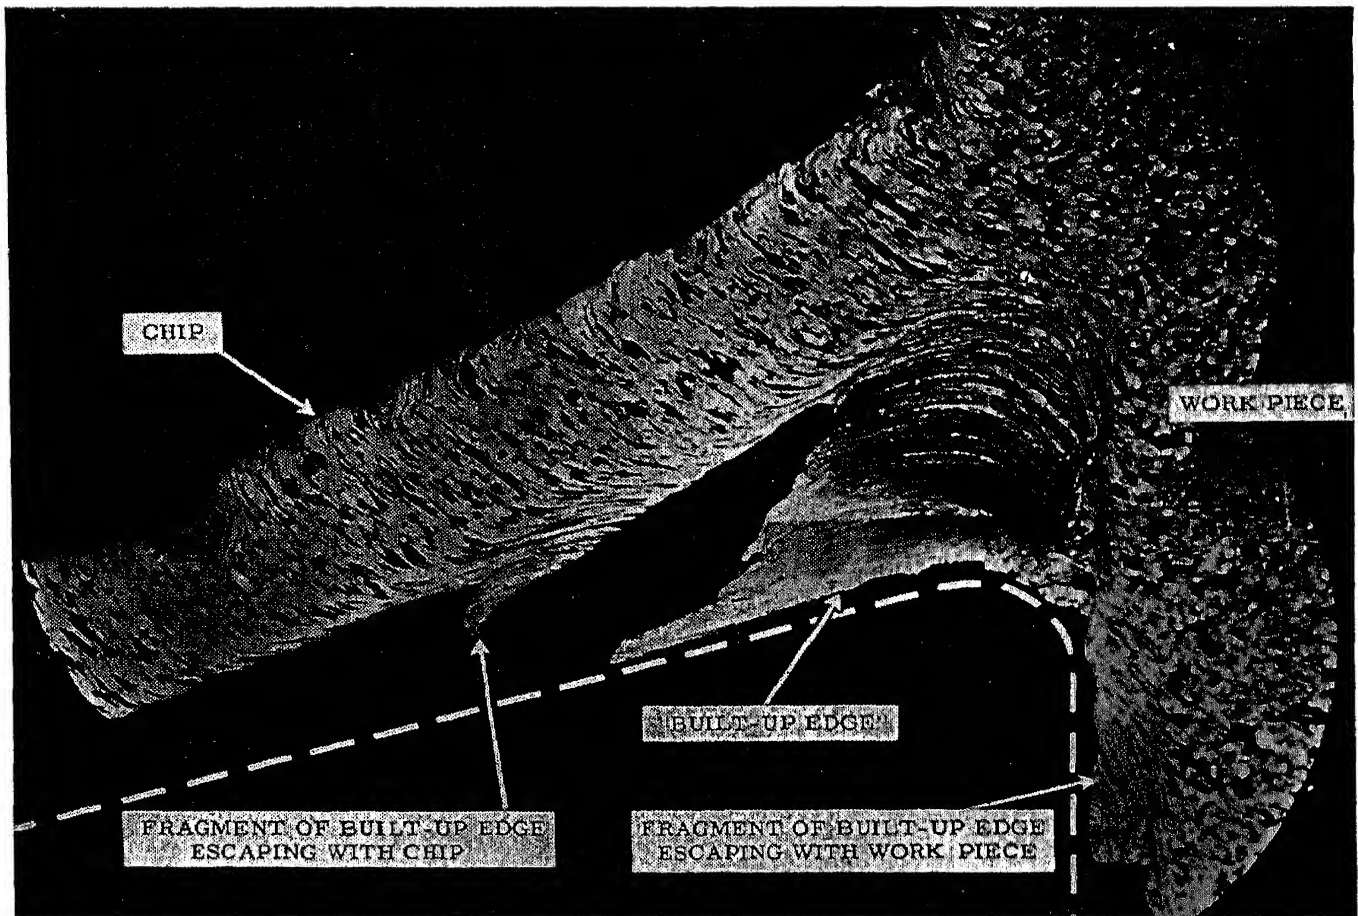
A composite photograph of a highly magnified chip and a built up edge. (Courtesy The Cincinnati Milling Machine Co.)
